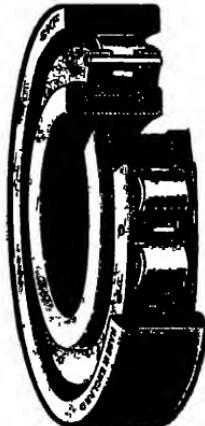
THE SKEFKO SINGLE ROW ROLLER BEARING
